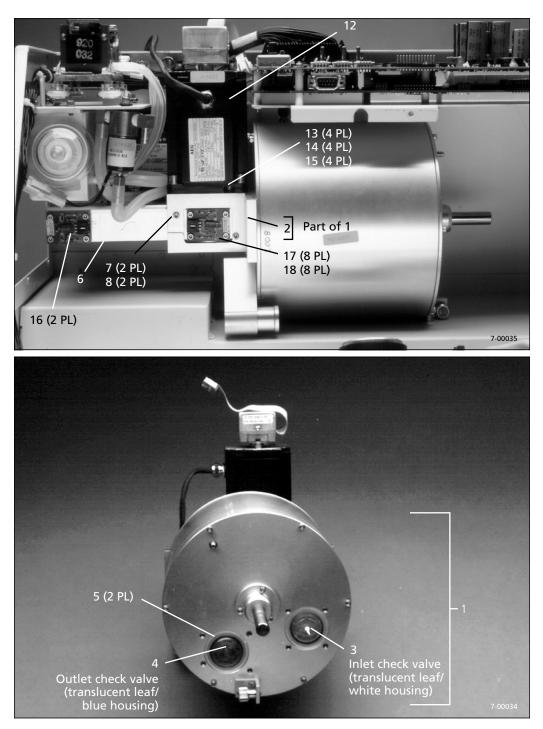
Piston/cylinder and motor/encoder assemblies (Sheet 1 of 2)
